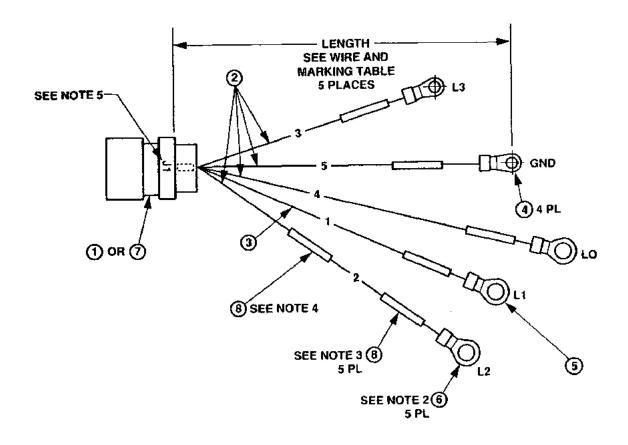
Switch Box Harness Assembly W9 (NEW) (Sheet 3 of 4).
